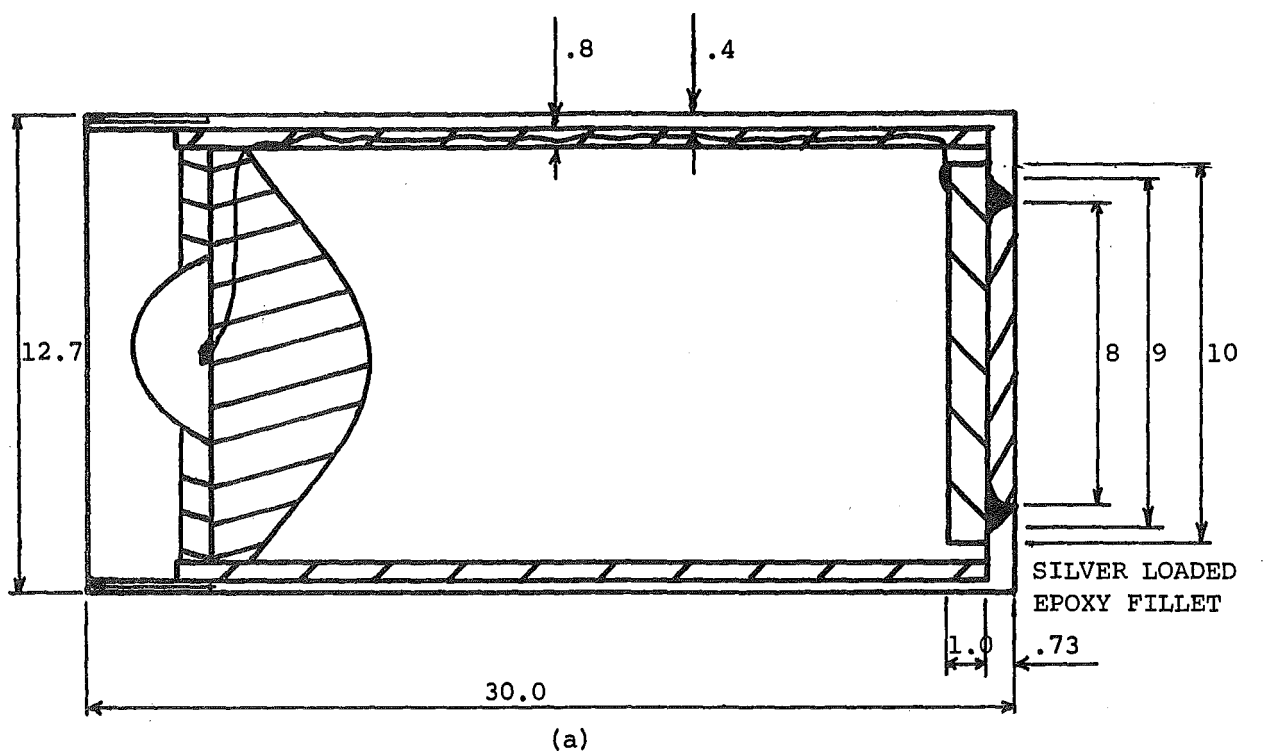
Transducer construction details. Dimensions are in mm.
